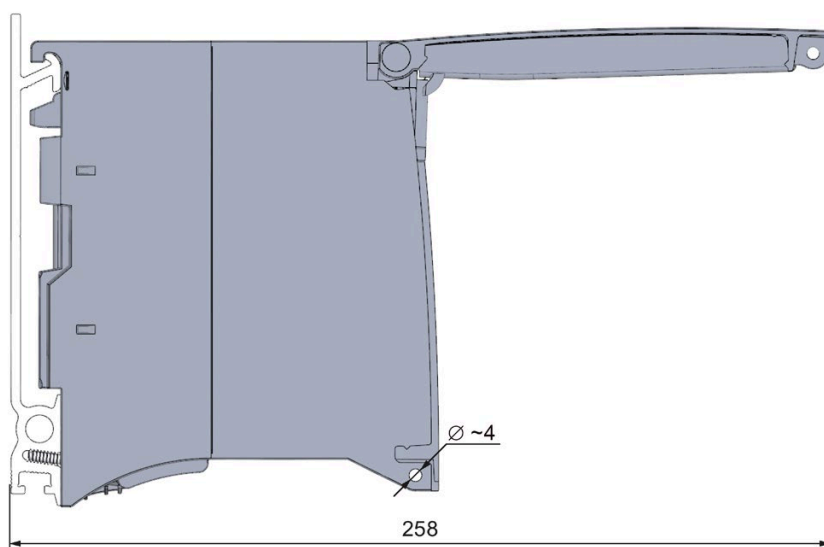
Dimensional drawing of the CPU 1516T-3 PN/DP, side view with open front panel
